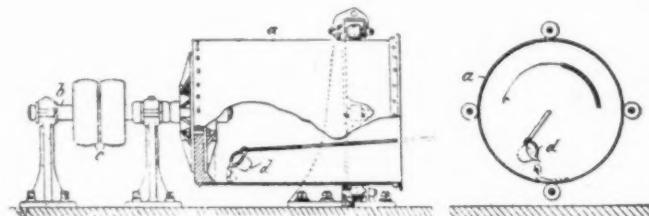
A DEVICE FOR PRODUCING METAL STRIPS FROM MOLTEN METAL.
